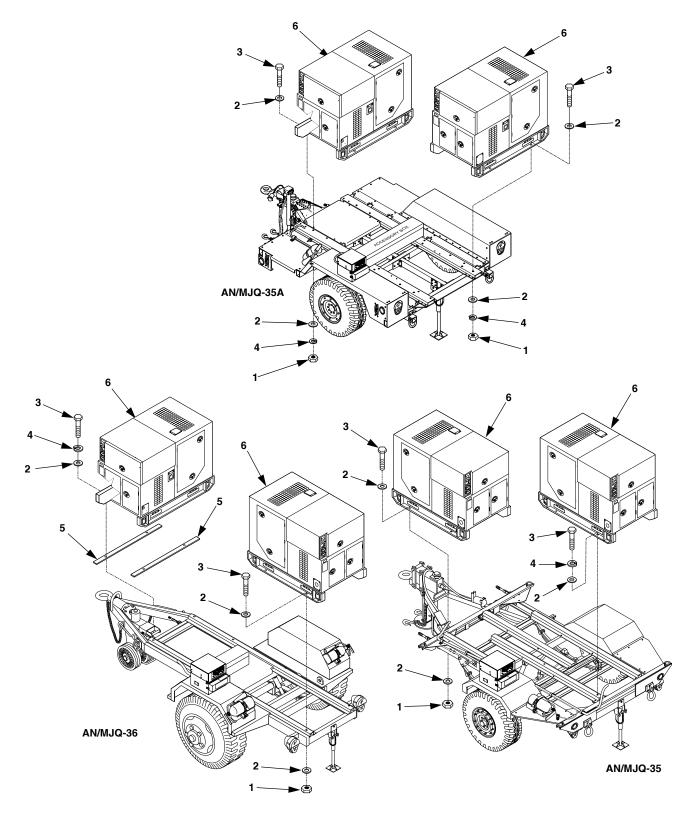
Removing Generator Set Mounting Hardware (Sheet 1 of 2).
